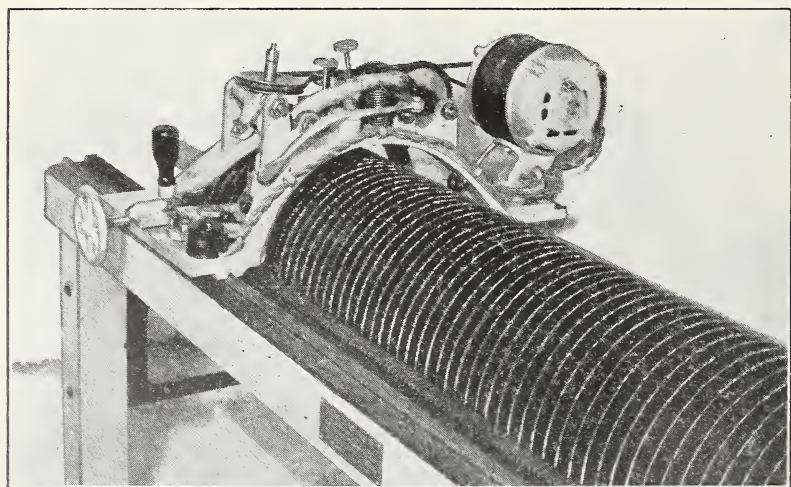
A semiportable motor-driven filing machine with rotary gummers only, the side dressing being accomplished by hand with a special flat mill file.
